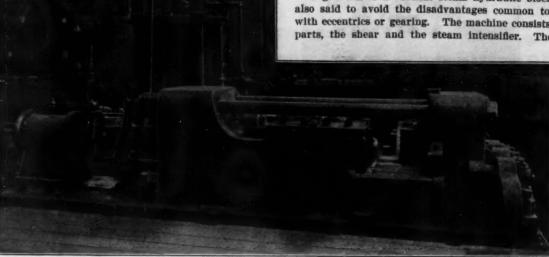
German Steam Hydraulic Shear of Horizontal Construction.
